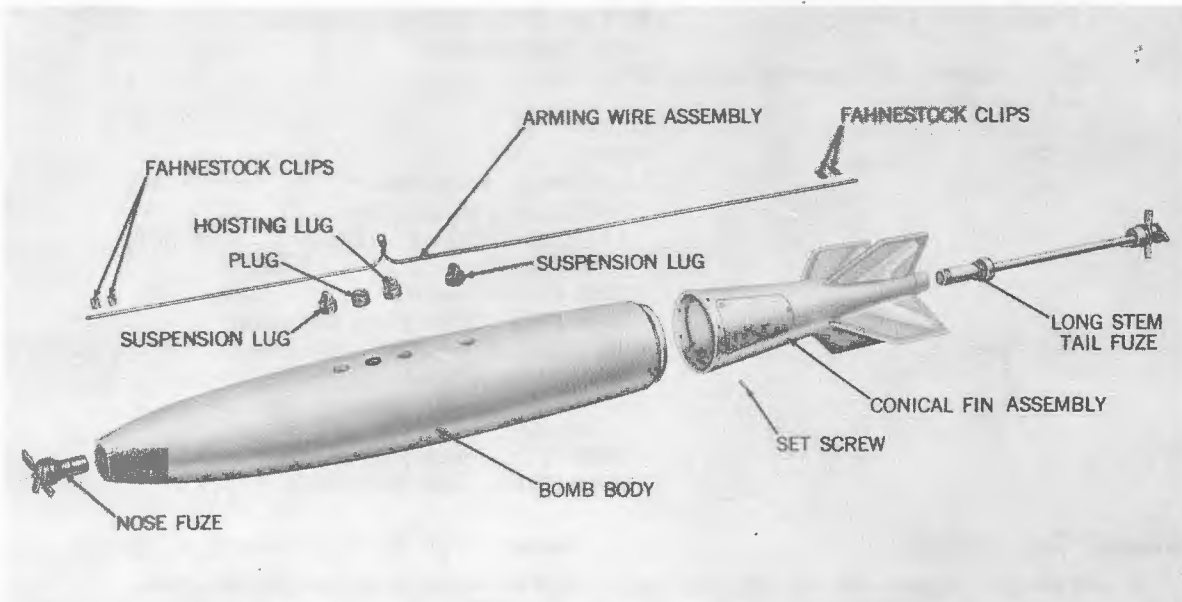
500-lb Low-Drag Bomb (GP) Mk 82 Mod 1 (Mechanically Fuzed), Exploded View.
